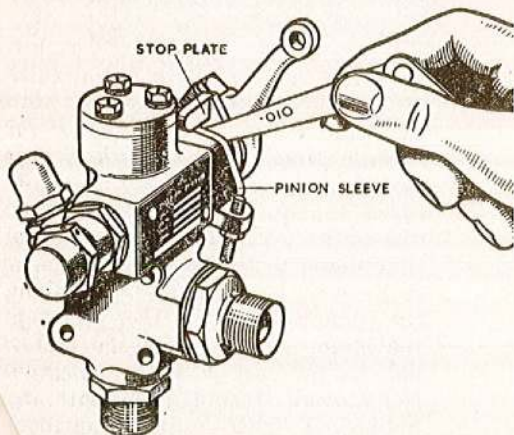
Measuring the end float between the stop plate and the adjoining face of the pinion sleeve
